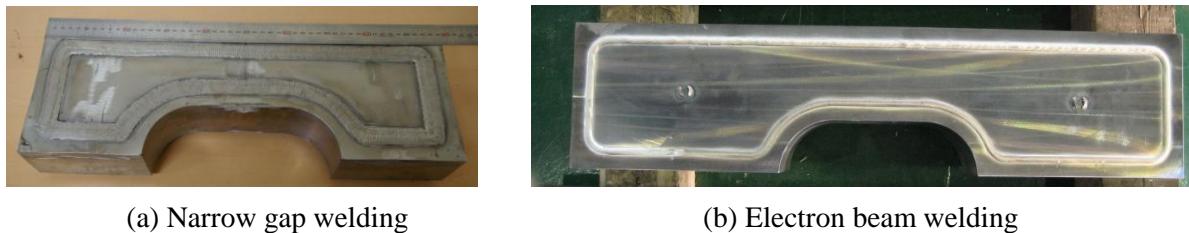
Front header mock-ups manufactured by EBW and narrow gap welding.
